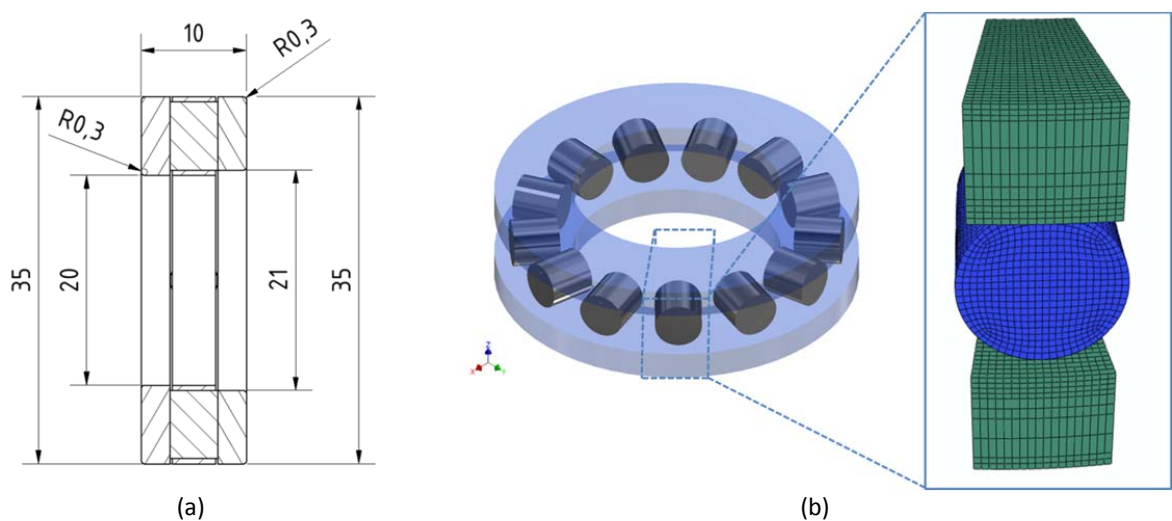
(a) Dimensions of the bearing FAG 81104-TV in mm [41]; (b) three-dimensional finite element mesh section of the bearing without the cage
